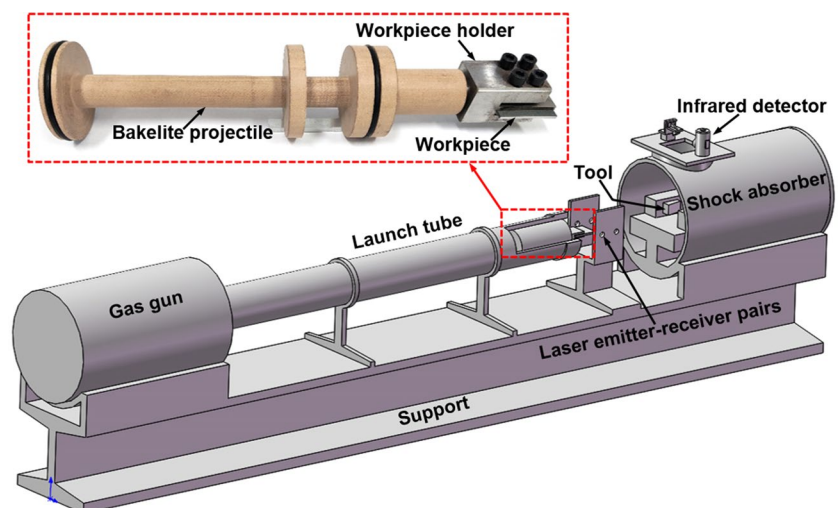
The actual ultra-high-speed cutting experimental setup. The insert shows the cutting platform
